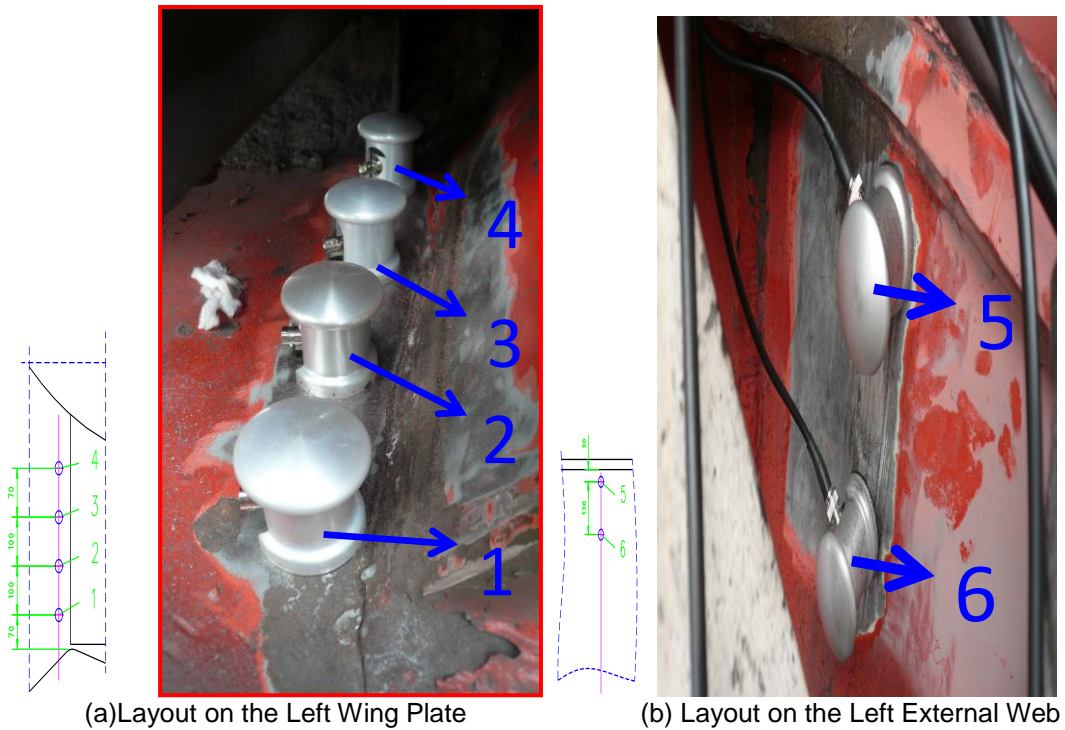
Sensor Arrangement Scheme No.1 for the Slew Deck with Pylon Cracks
